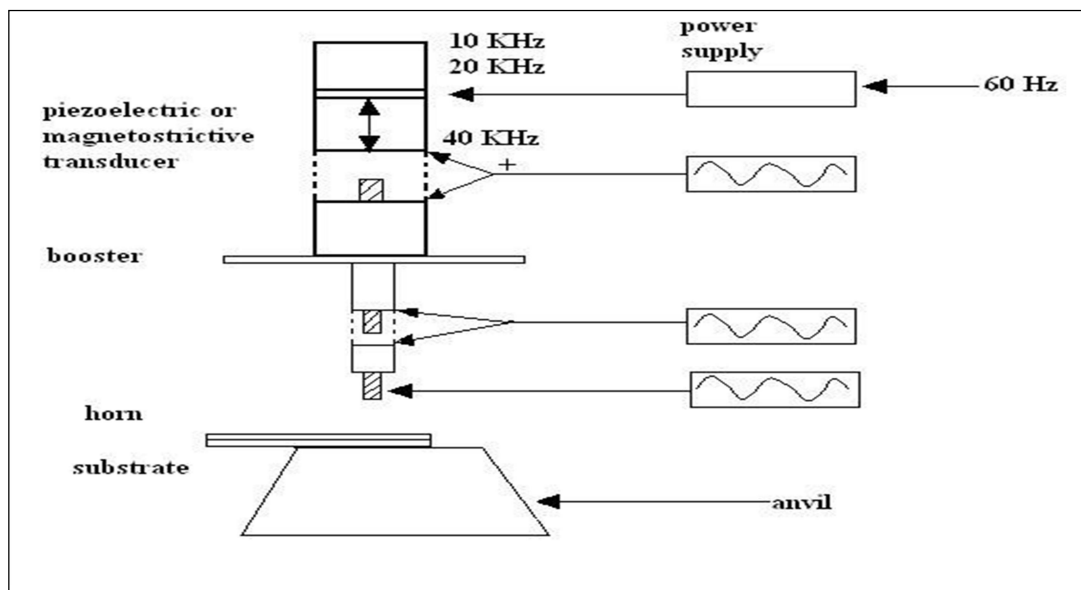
Arrangement of an ultrasonic welding device
